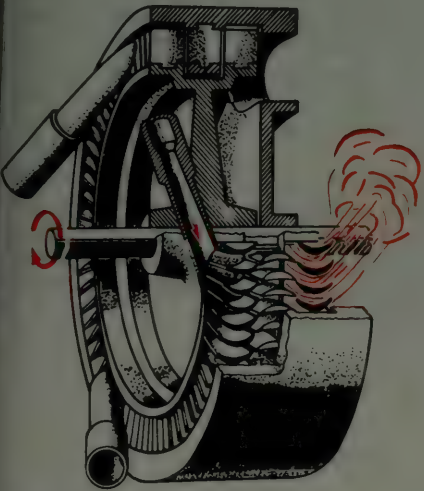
DRIVE OF A WHEEL WITH ROTOR BLADES (schematic)
